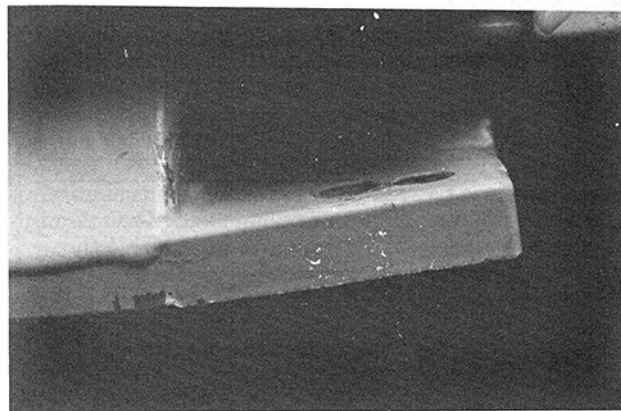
Close-up view of damaged motor drive-end support foot. Approximately 1/4 in. gap between support foot and support surface.
